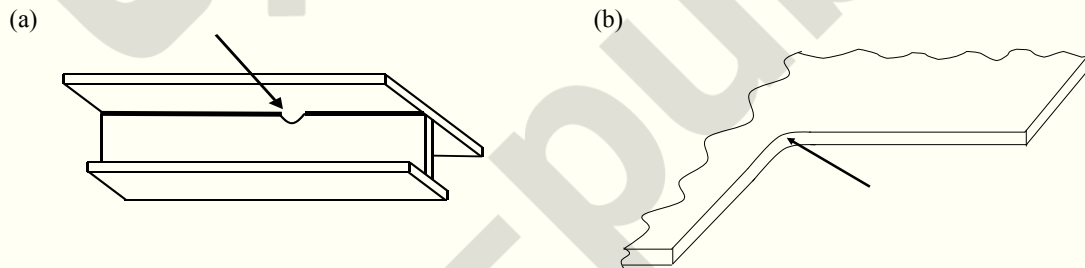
Container ship deck details, (a) scallop, (b) hatch corner
